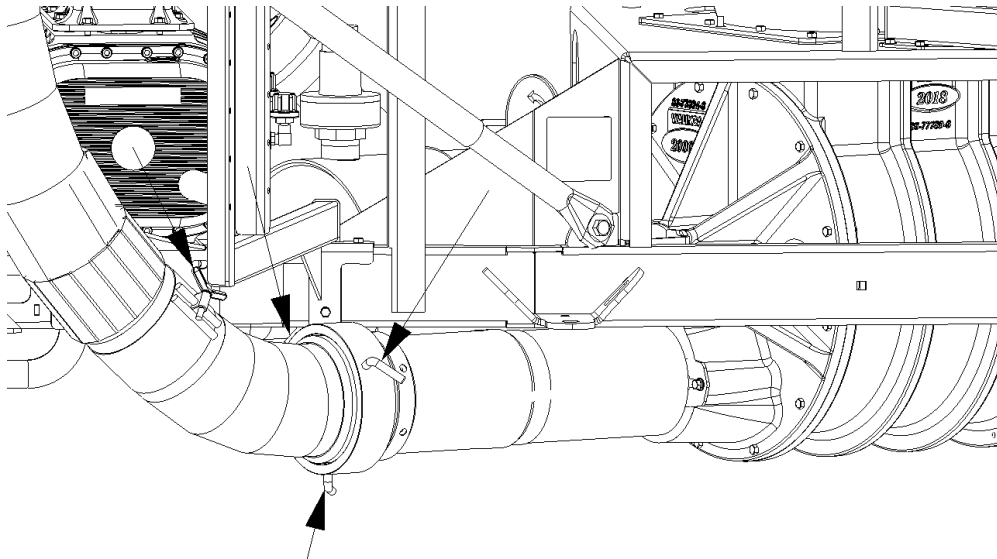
Airlock DF coupler and lower boom elbow coupler
